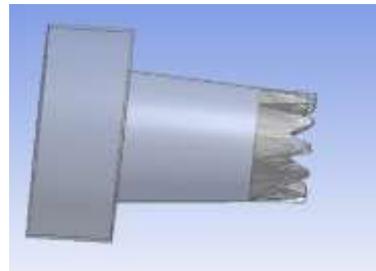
Three dimensional view of m lobe chevron with sinusoidal nozzle model
